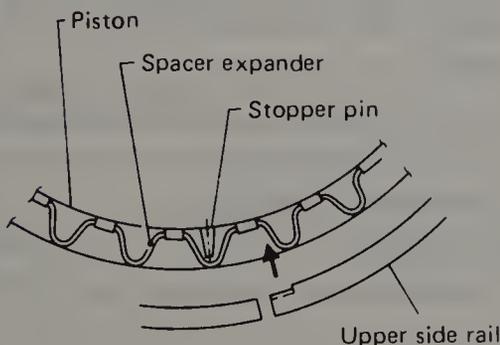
Installation details for Nippon oil rings (Sec 32)
